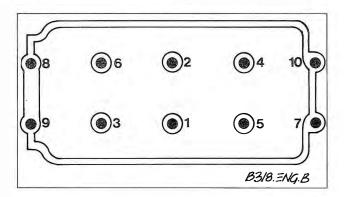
Cylinder head bolt tightening sequence for 4-cylinder engine.
